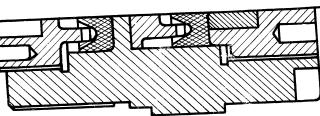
RECUPERATOR STUFFING BOX — ASSEMBLY
